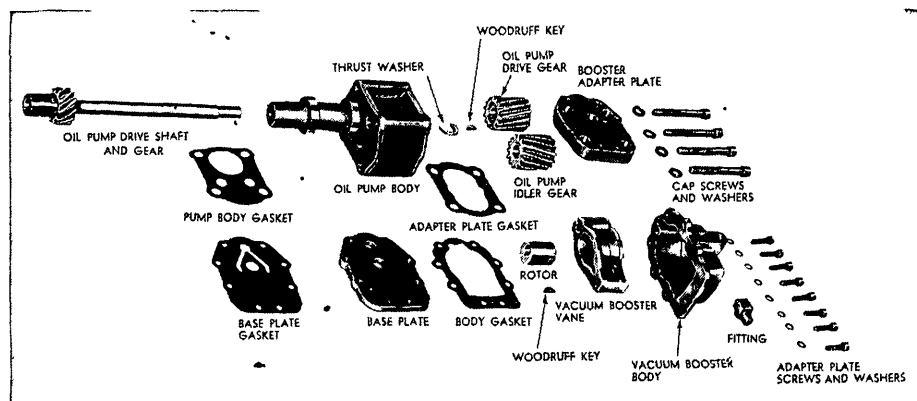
Layout of oil pump and vacuum booster parts on 1947 Commander. The booster is used for windshield wiper operation
